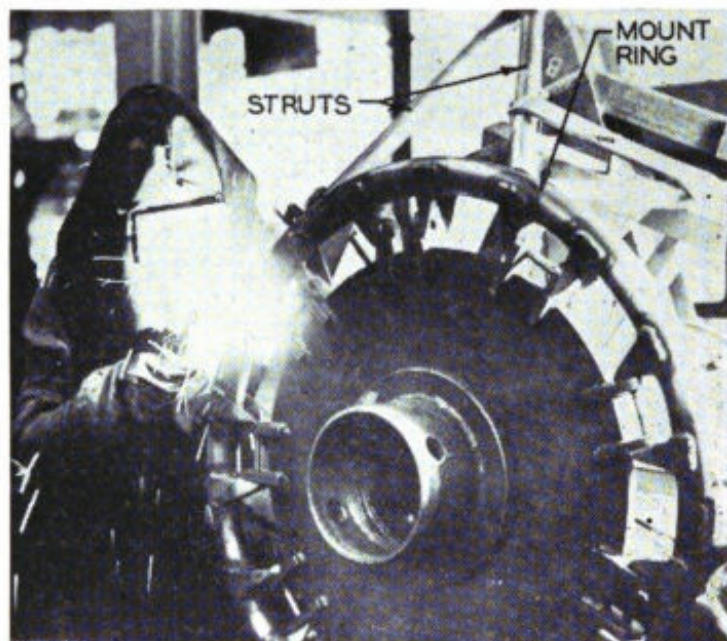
WELDING STEEL-TUBE FUSELAGE
